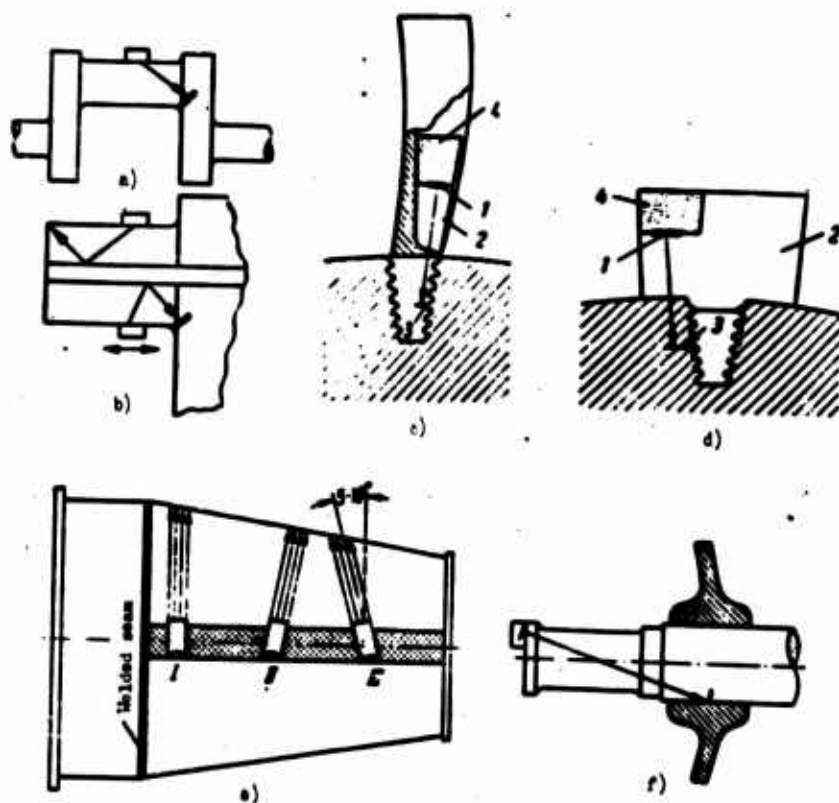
Diagram of detection of cracks: a and b) in crankshaft (without internal channel and with channel, respectively); c) in joint of turbine blade, mounted in disk; d) in slot of herringbone bracing of turbine disk; e) in housing of combustion chamber; f) in access part of axle of railroad car [288].
